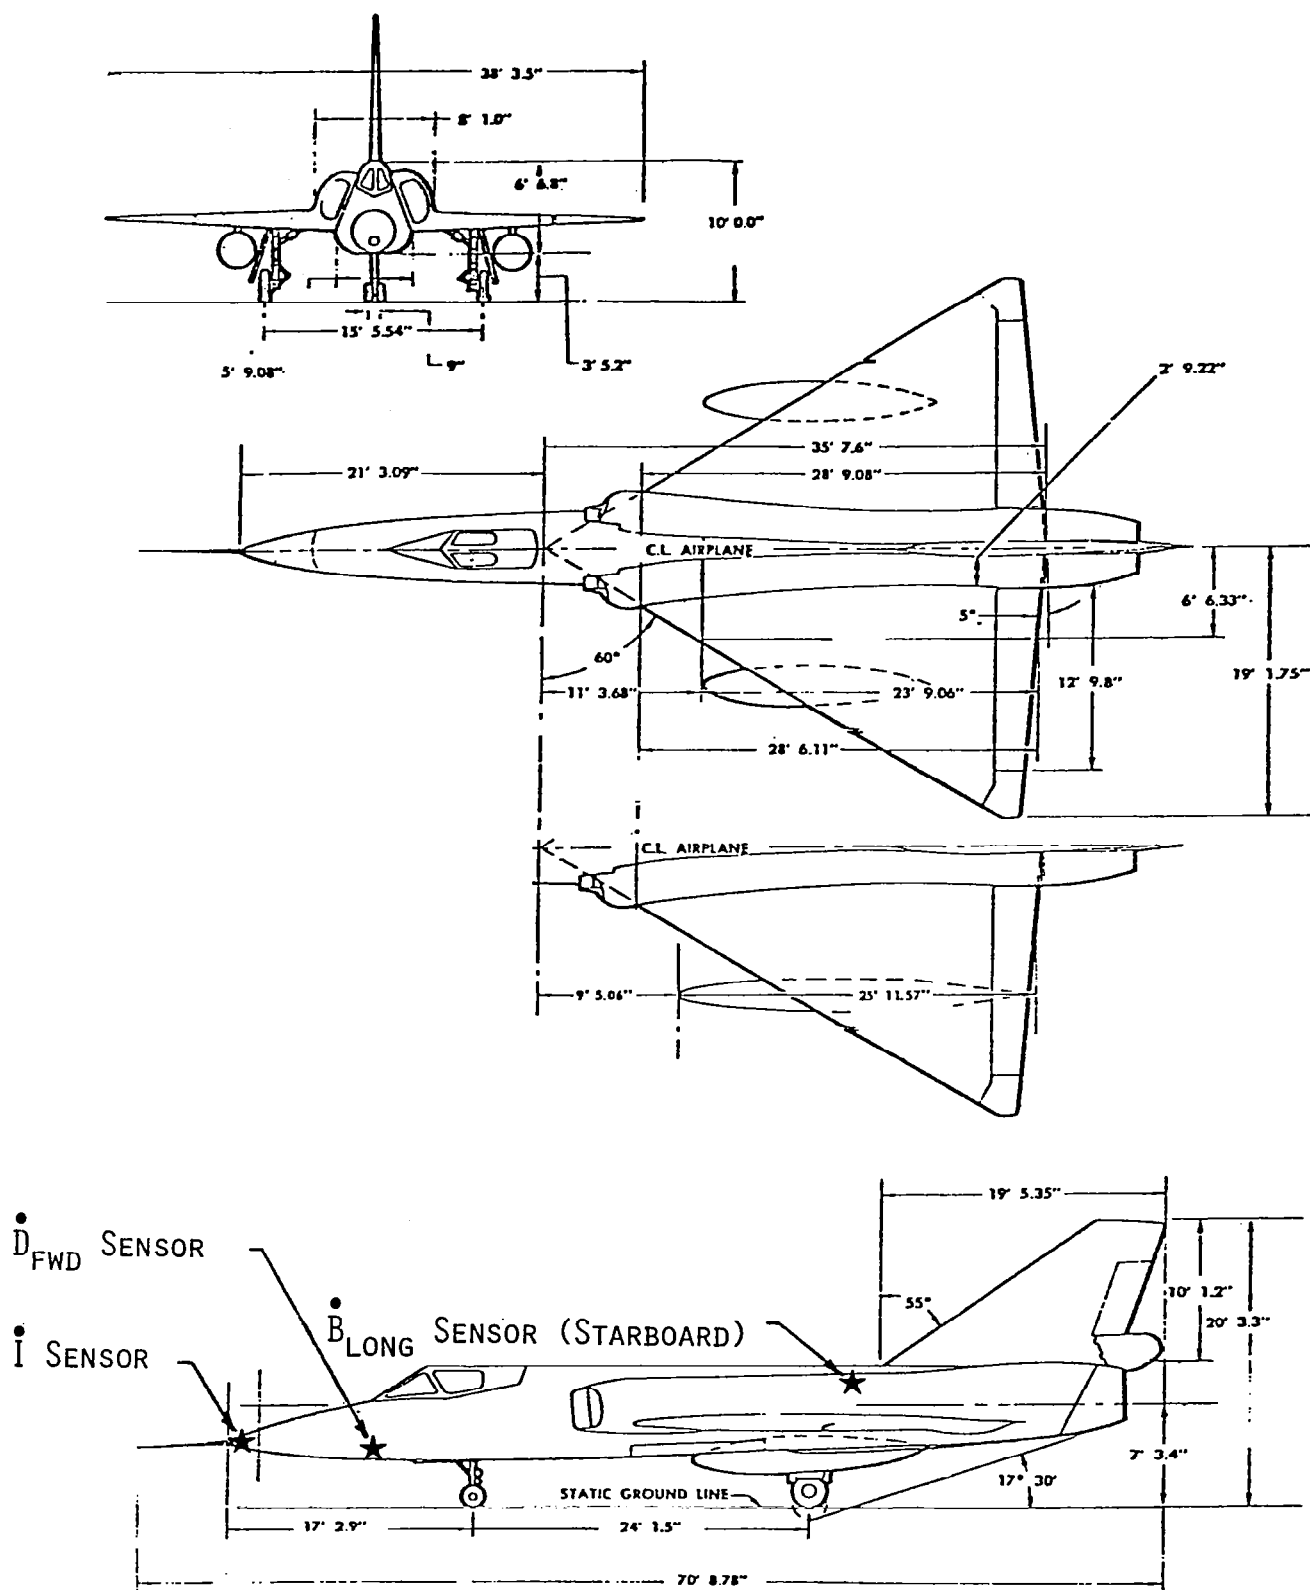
DIMENSIONS AND SENSOR LOCATIONS FOR F106
